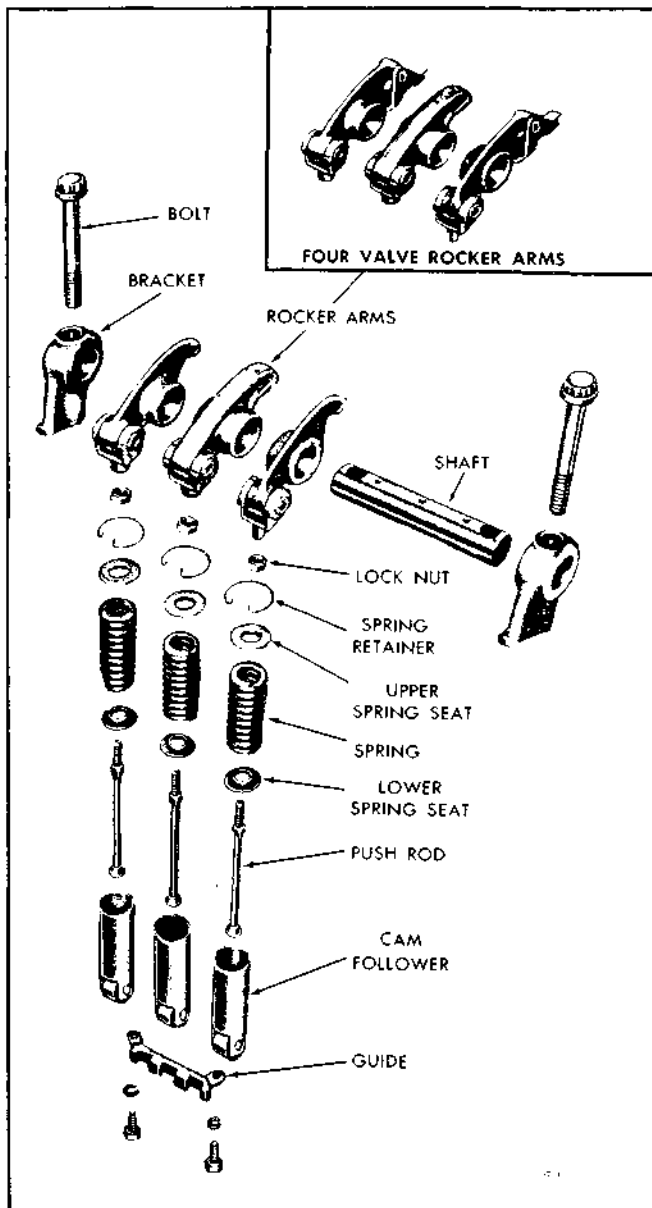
Valve and Injector Operating Mechanism Details and Relative Location of Parts
